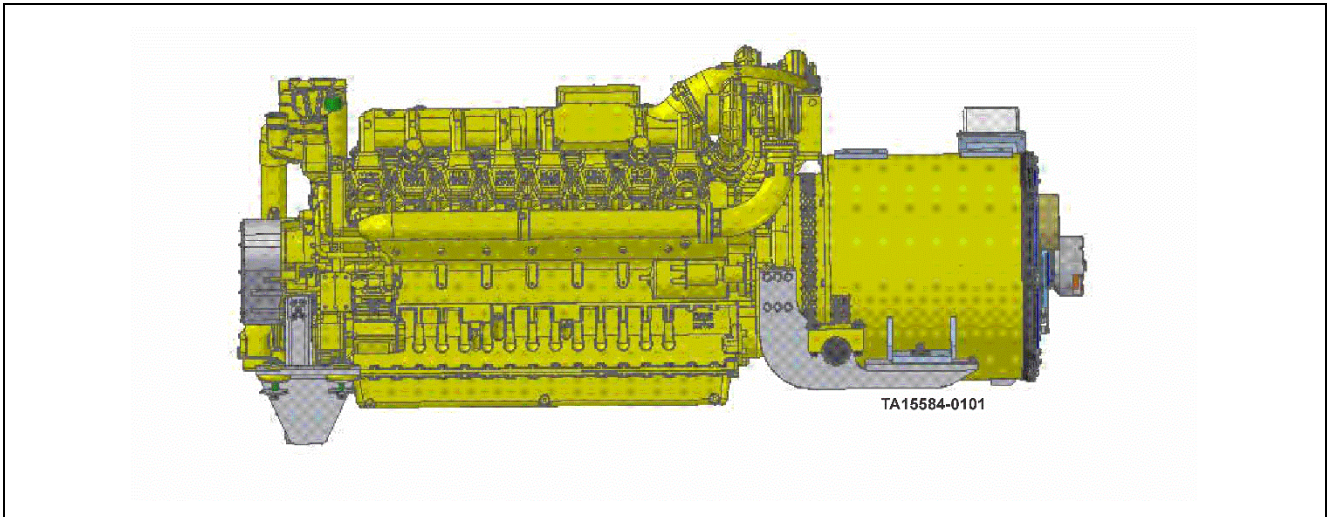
Detroit Diesel Engine with G100 Generator Mounted - Typical
